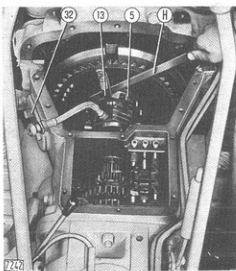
Checking Clutch Effort and adjusting the Ring Nut
